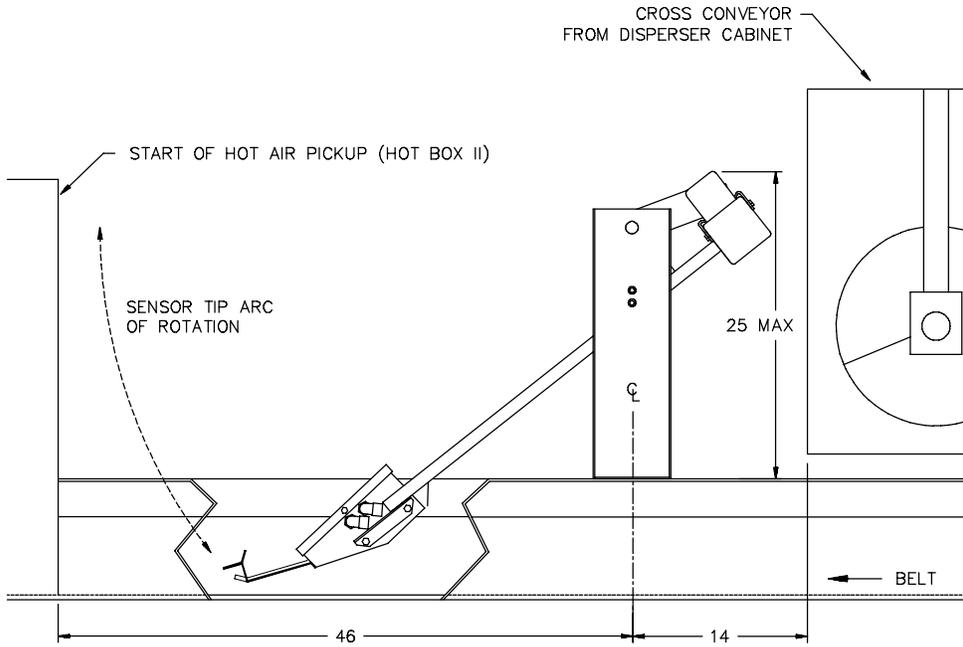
LOCATION FOR FLOATING SENSOR ASSEMBLY ON CONVEYOR TROUGH
